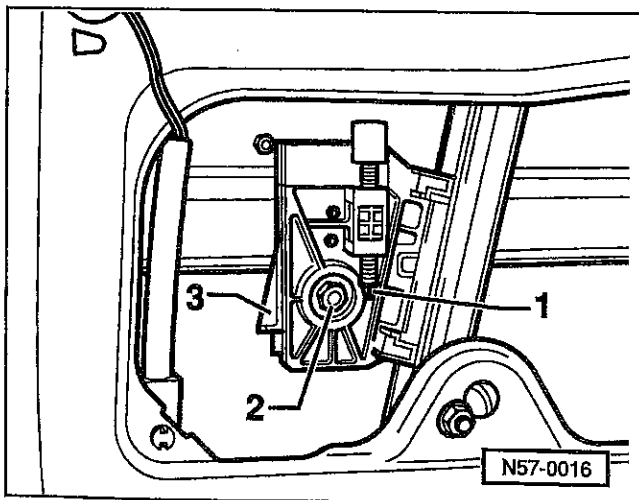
Cabrio door glass adjustment mechanism as viewed with door panel removed. Height adjustment screw is shown at 1. Clamping jaw nut shown at 2. Adjusting wedge shown at 3.
